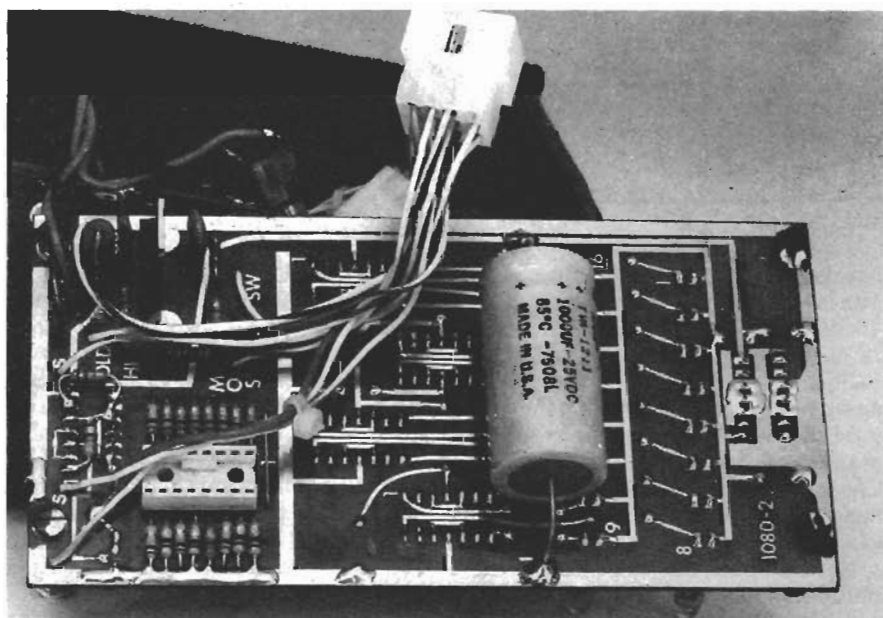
"FOIL-SIDE" of display board. Multi-wire assembly connects to components on panel board.
